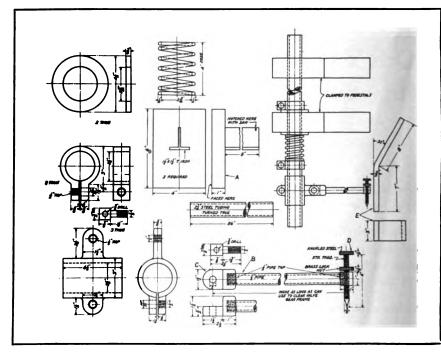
Detail drawing of parts required for instrument for squaring locomotivo frames.
